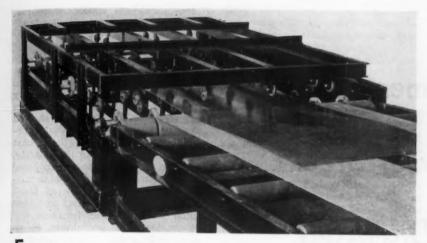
Special mechanism for handling finished sheets known as a "sheet dryer."
